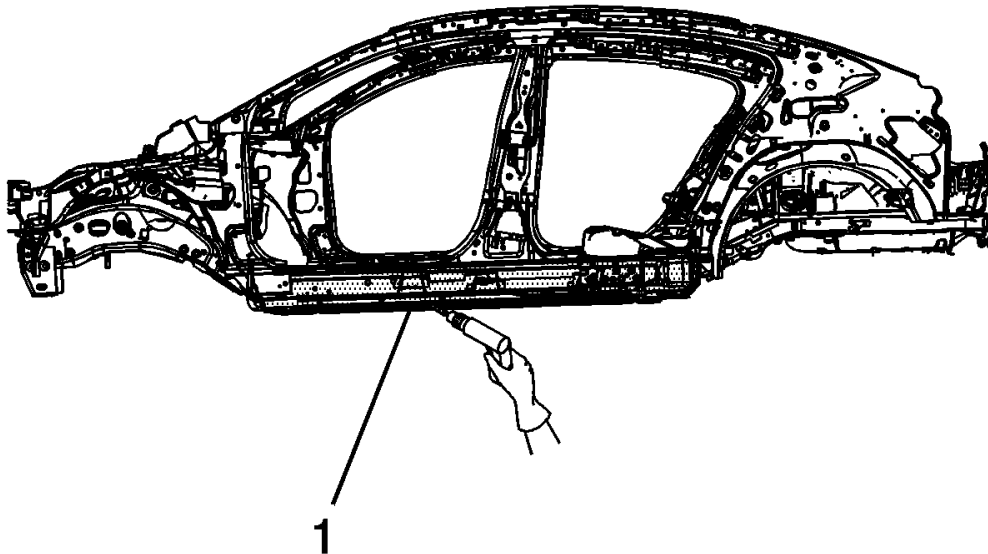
Drilling Rocker Inner Panel Reinforcement Factory Welds
